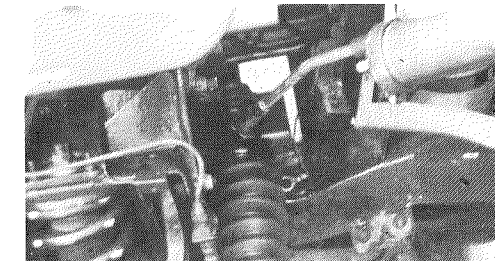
And finally. Reconnect the upper and lower steering column joints (steering wheel centred, wheels straight ahead) and squirt about five strokes of LM or similar grease into the rack. The earth lead shown here a dangling can then be fixed back on. Finis.
